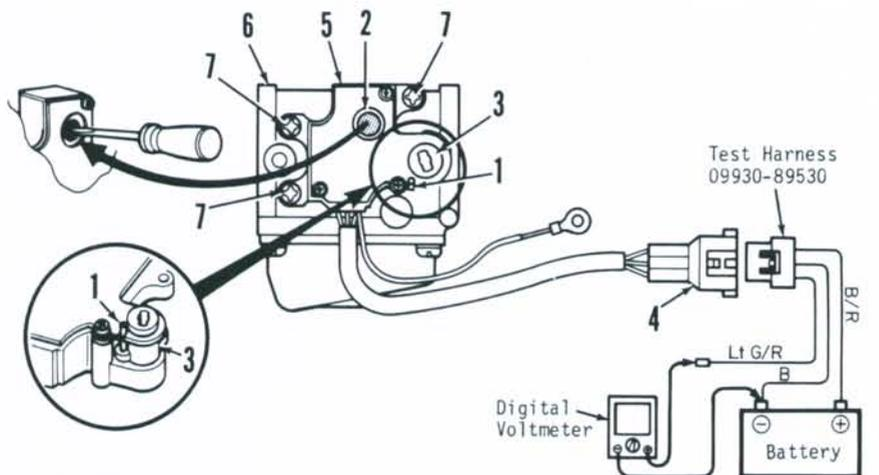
Refer to text for throttle valve sensor testing and installation procedure.
